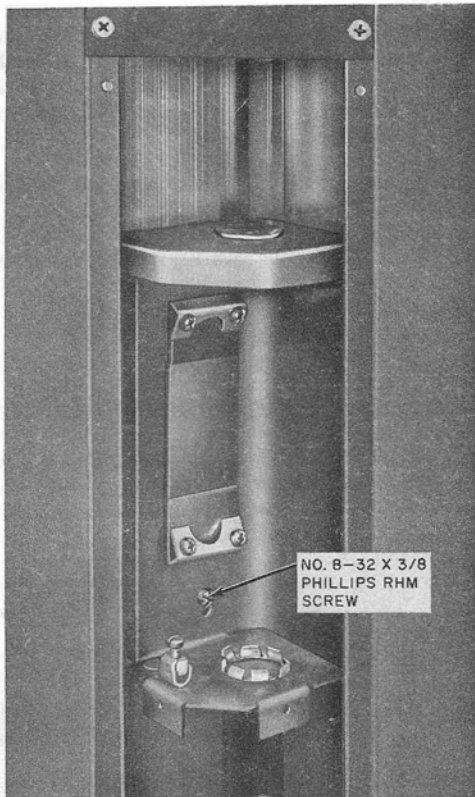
Installation of Circuit Breaker Box in Lower Backboard
